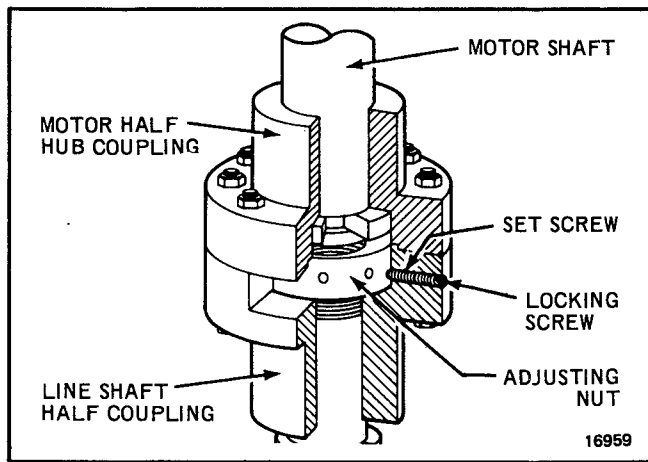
IMPELLER ADJUSTMENT - SOLID SHAFT
